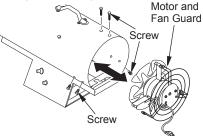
Removing Motor and Fan Guard from Heater (Heater may vary from illustration)
